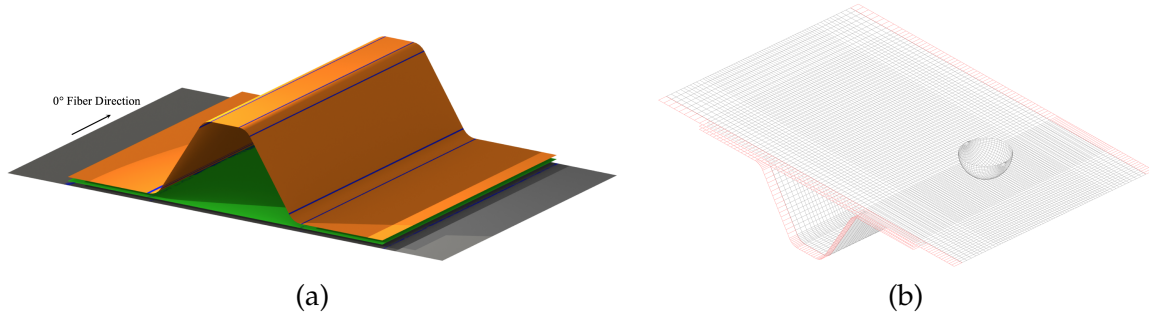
Stiffened composite panel: (a) CAD model and (b) IGA model and mesh. Blue thin surfaces in (a) represent bending strips. Clamped boundary conditions are imposed on the elements highlighted in red in (b).
